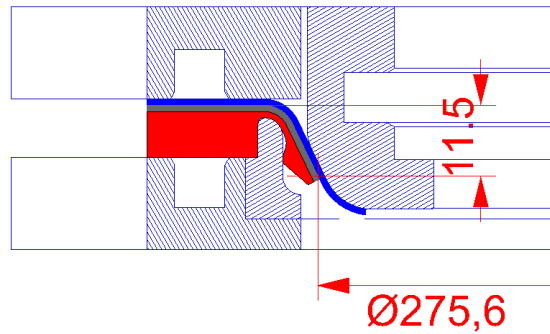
Axial-symmetric cross section of the tooling for the forming of the driver hole rim with main dimensions (in millimetres) as resulting from springback correction
